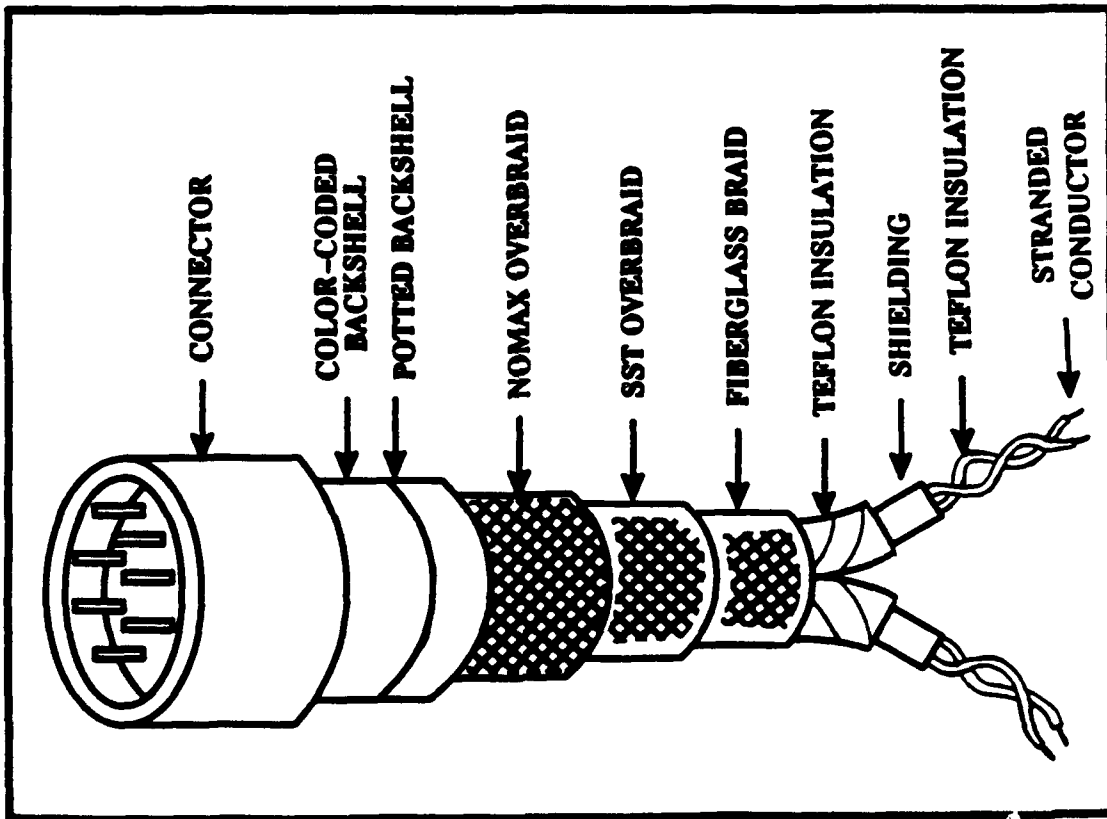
System Shielding and Grounding Plan Provides RFI, EMI and Lightning Protection
